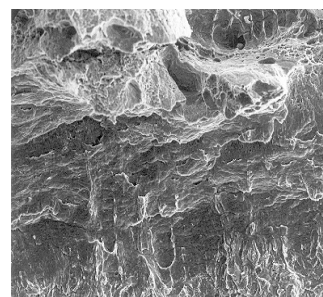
Crack surface after ductile crack initiation and stable crack growth (SZW and dimple crack surface)
